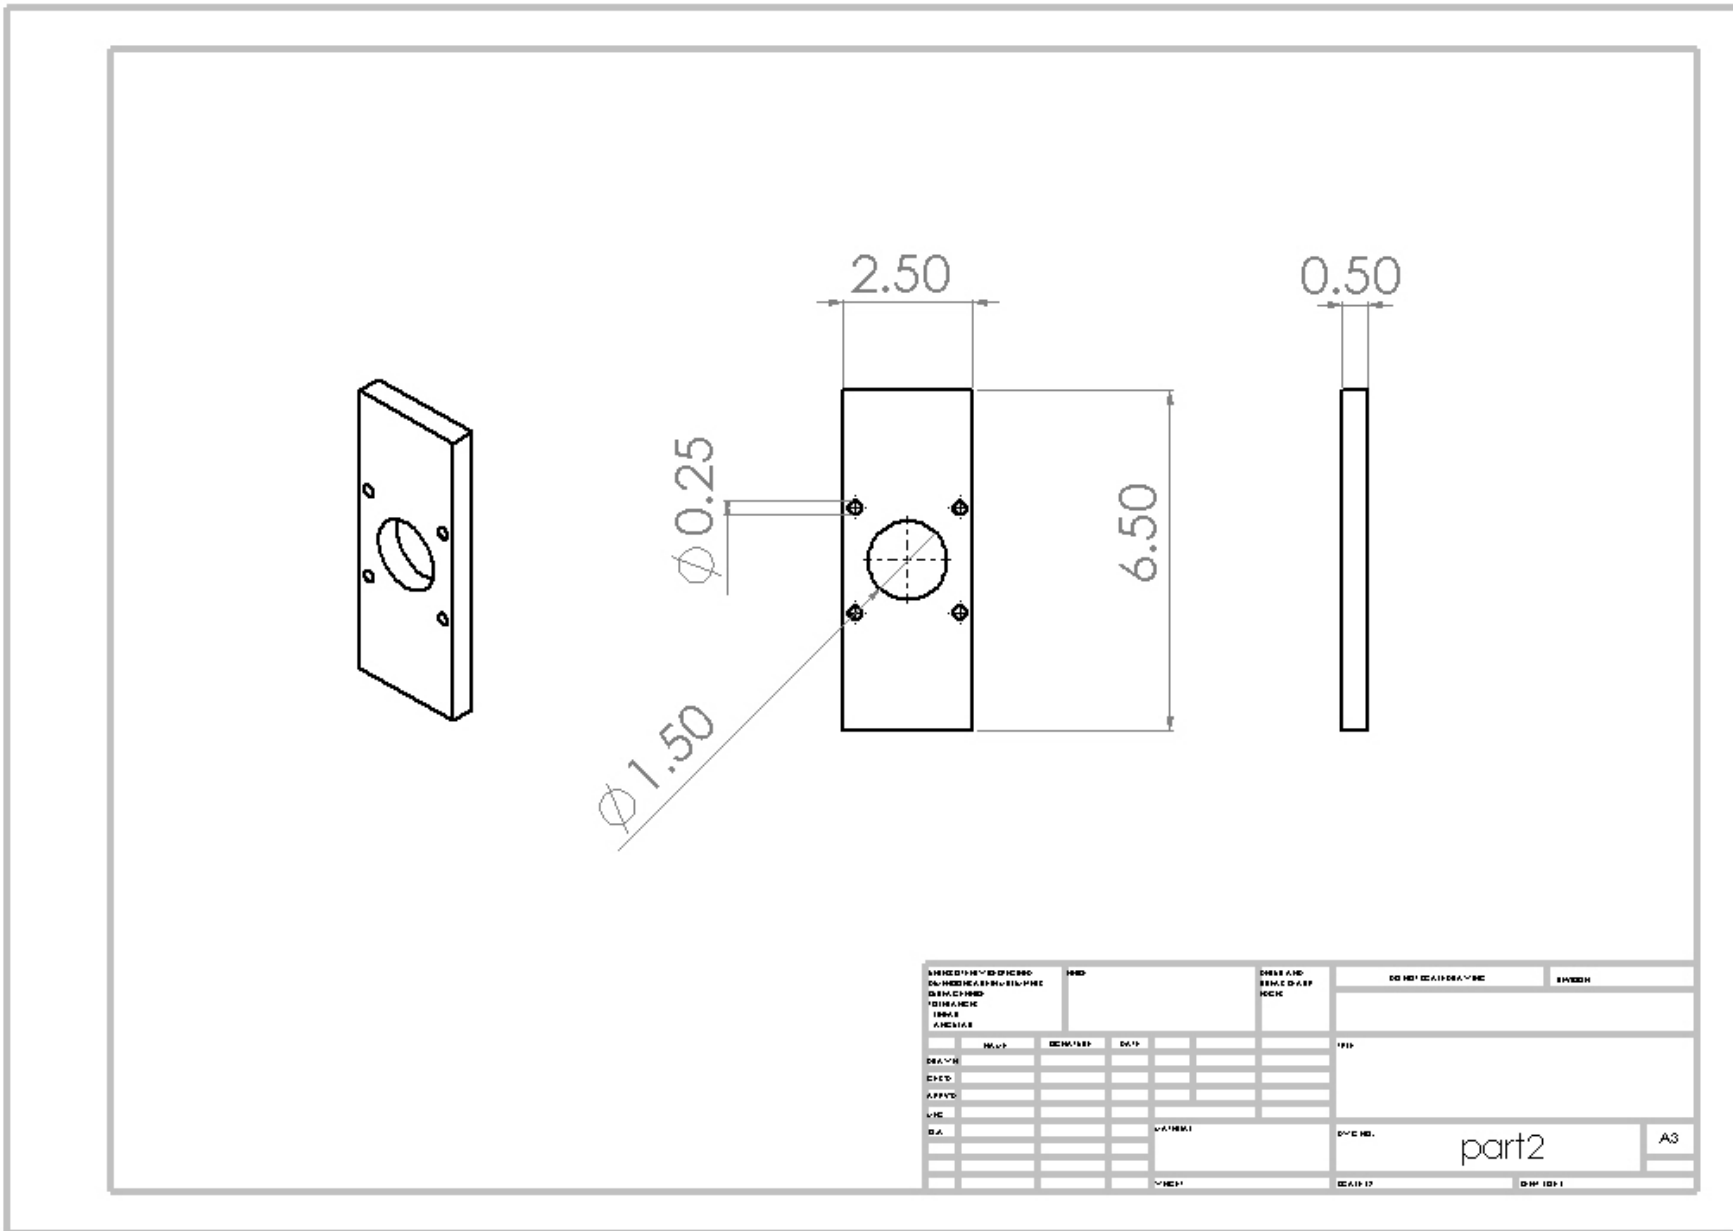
Backplate*. This part will attach to the whole pump and also to the faceplate supplied to us. The main shaft will house a ball bearing which will fit in the big center hole, and this in turn will hold onto a main shaft which will turn the rollers and will connect directly to the gear that will be turned by the fan.
